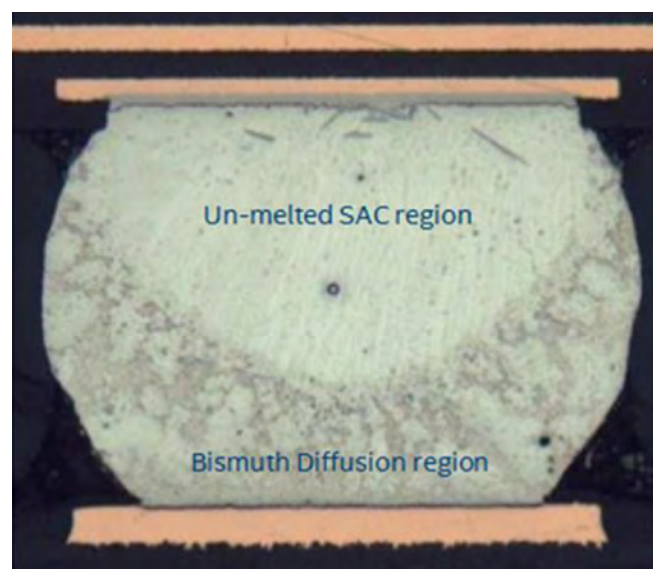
Typical joint formed by reflow of an Sn-Ag-Cu solder ball with an Sn-Bi low-melting-point solder.
